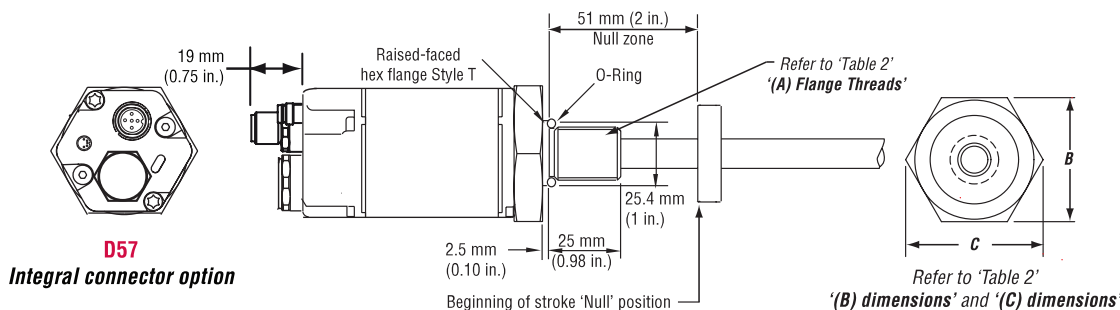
Model RH Rod-style sensor dimension reference (Shown with the D57 Integral cable connection type option)
